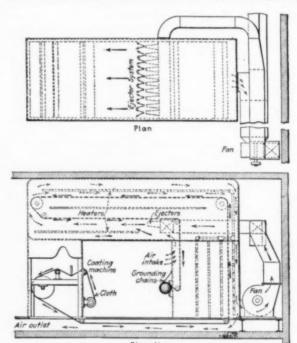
Plan and Elevation for Drying Equipment for Pyroxylin Coating Machines
